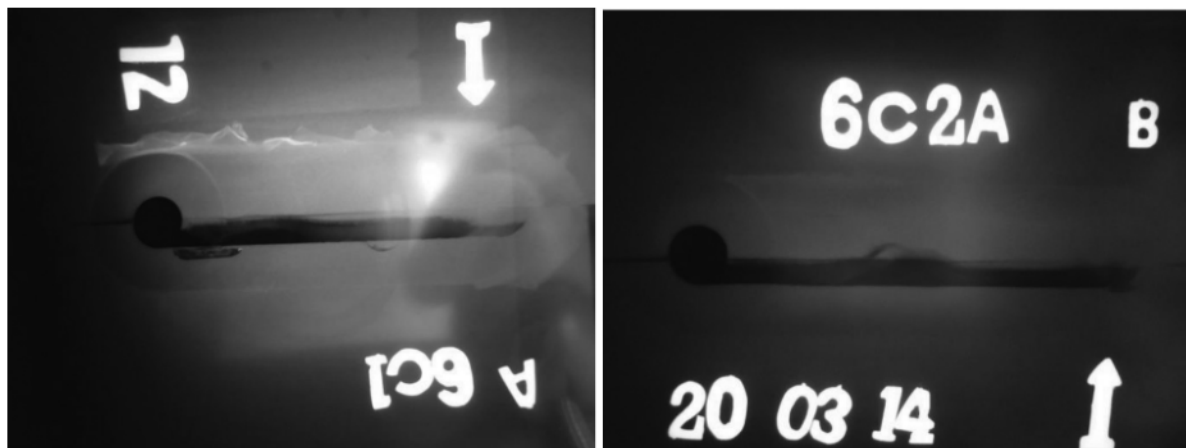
Radiographs of the welded Al-Cu alloy: a) defect-free weld, b) tunnel-defect weld
